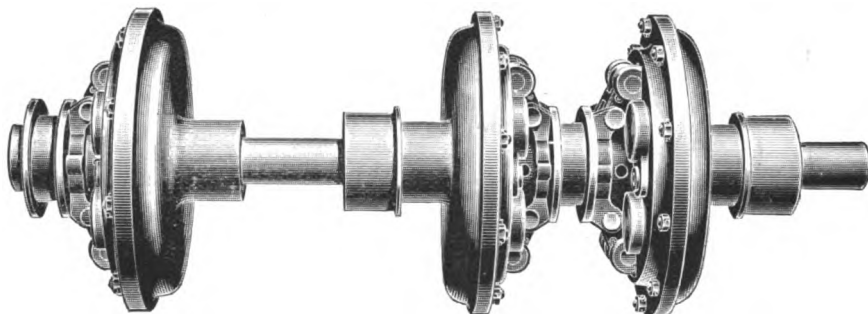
THREE CHAMPION CLUTCHES ON ONE SHAFT.
